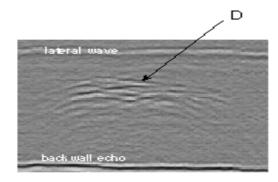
TOFD D-scan of butt weld and defect
